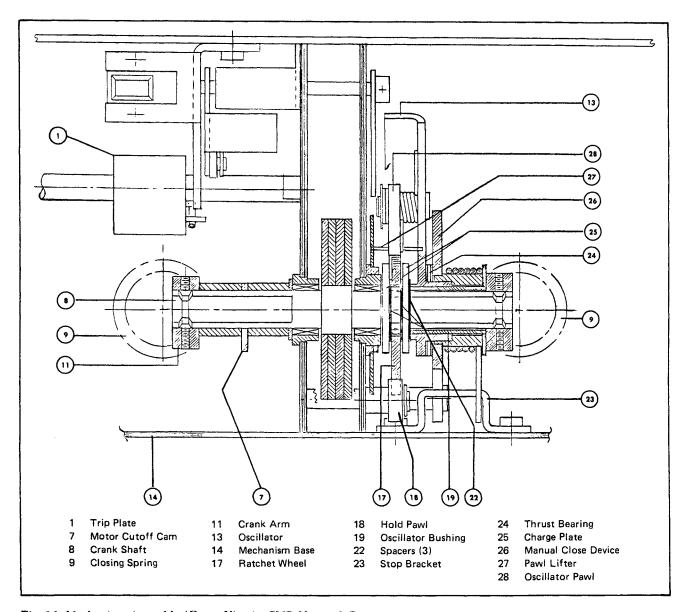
Mechanism Assembly (Front View): CMD Network Protectors
